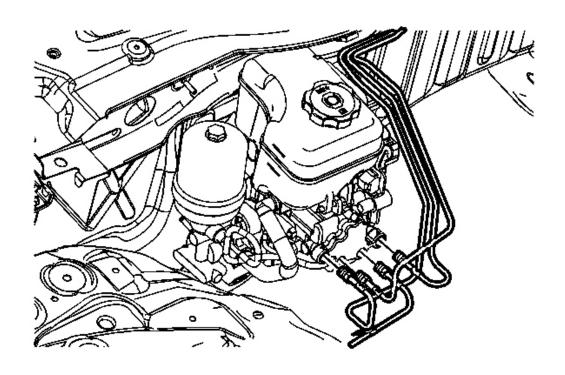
View Of Brake Pipe Fittings & The Master Cylinder Courtesy of GENERAL MOTORS CORP.
